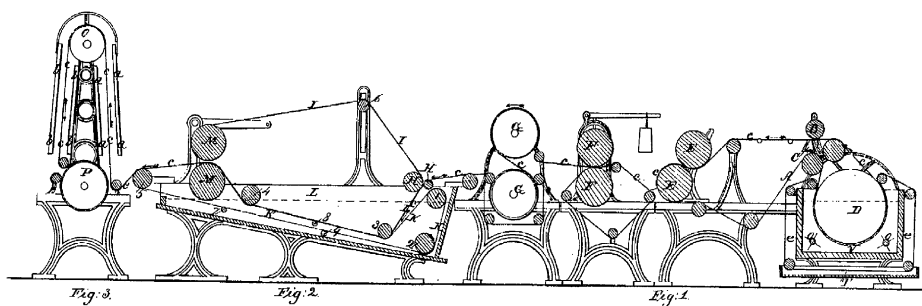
Patent drawing of early paper machine from the 1830s (US patent 8,698). All of the basic processes of a modern machine are present in this machine.
